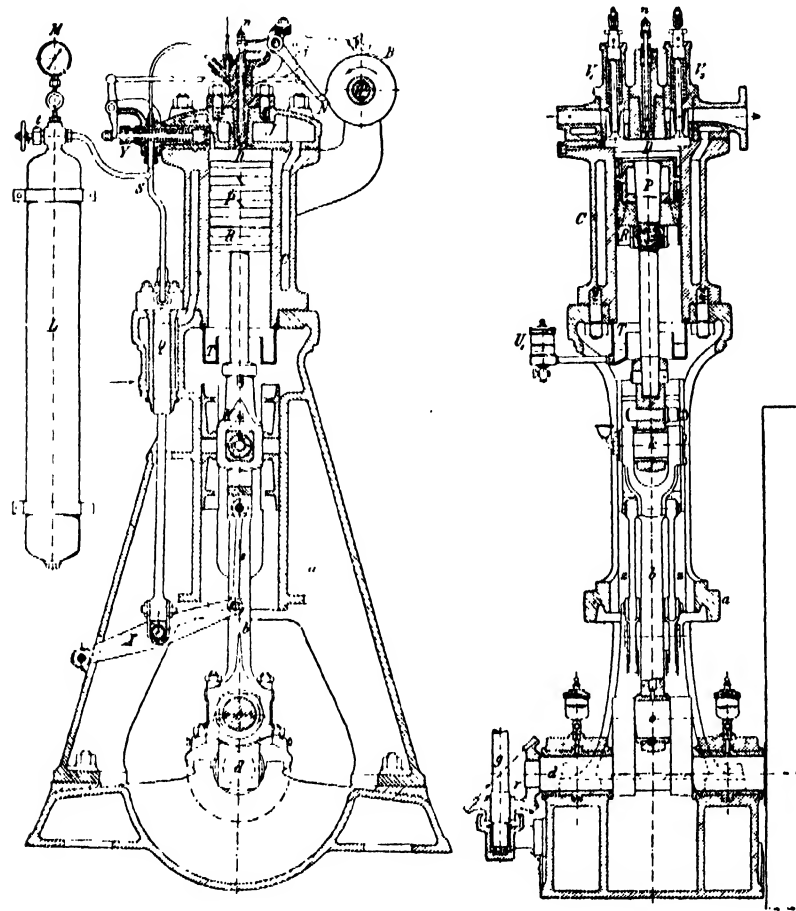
Sectional Side and Front Elevations of Diesel Engine
